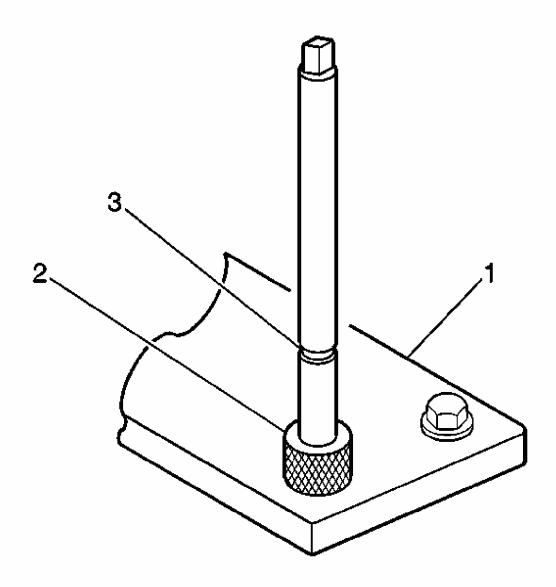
View Of Fixture Plate, Drill Bushing & Tool Marking Courtesy of GENERAL MOTORS CORP.
